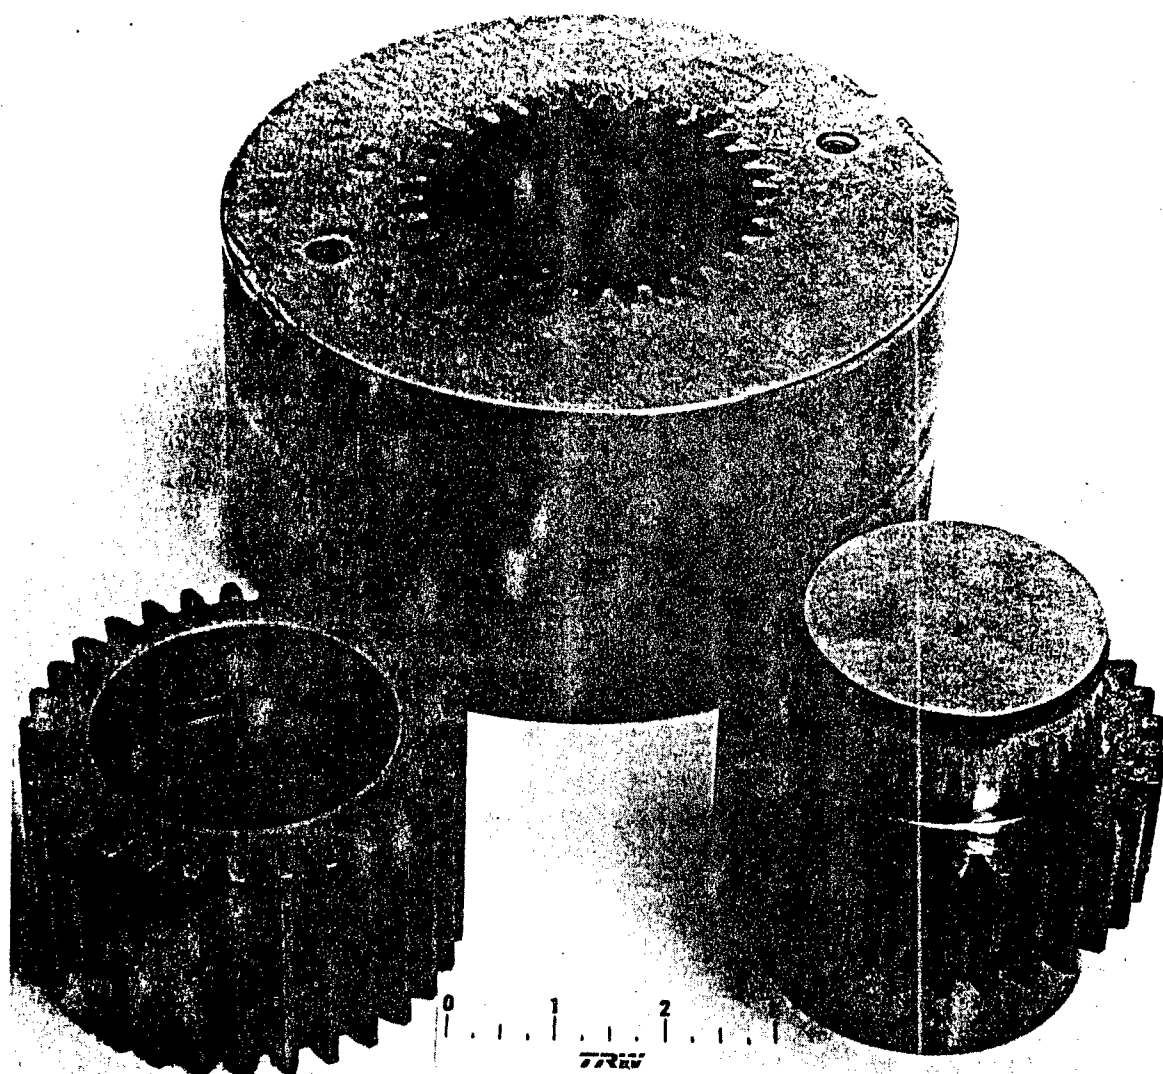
Forging Tooling Components for M-2 Pinion Gears.
